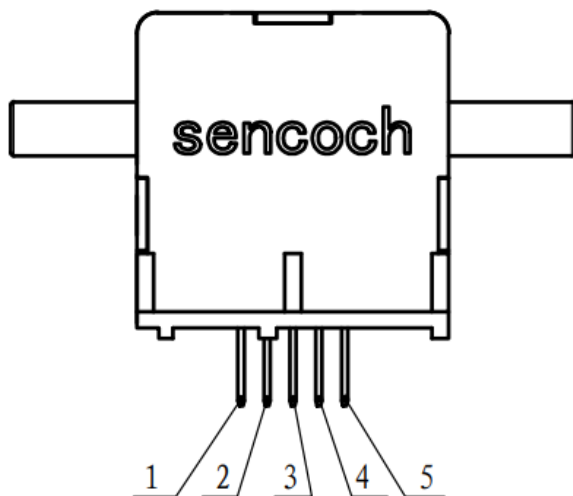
2.54mm 5 Pin Vertical Mounting Connector
